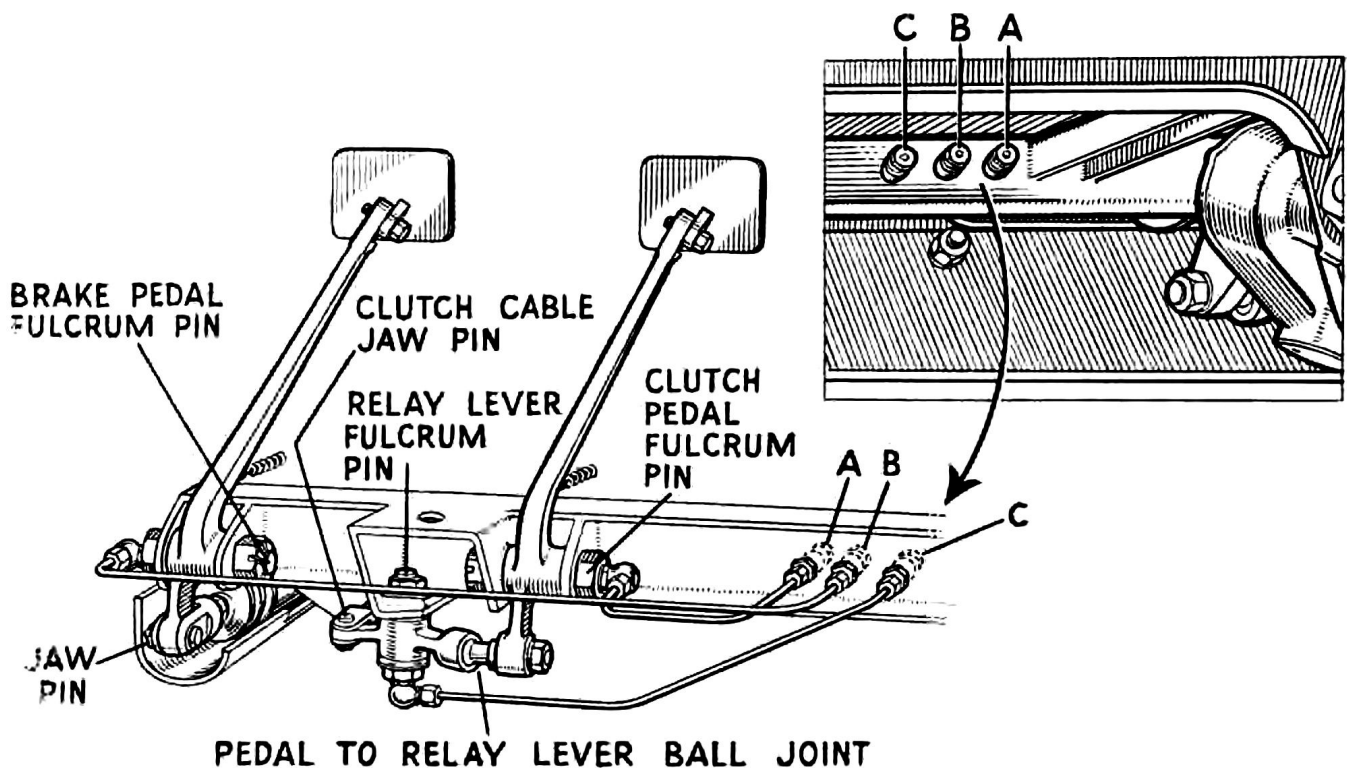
CLUTCH AND BRAKE PEDAL LUBRICATION
